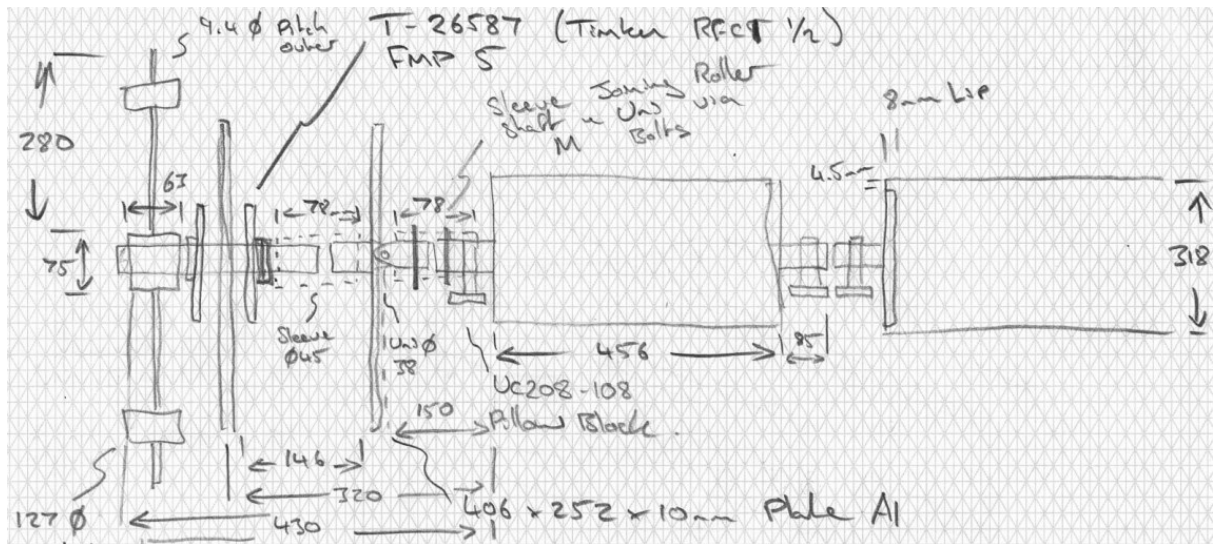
A hand drawn schematic of the wheelchair ergometer's rollers complete with dimensions in millimeters (McKenzie, 2018)
